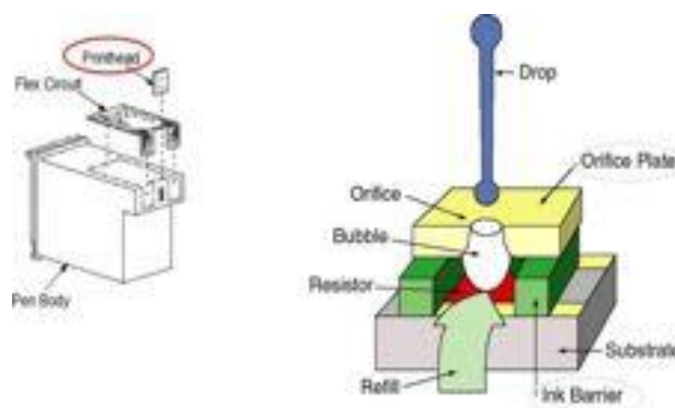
Print Head (Engine) for all HP Inkjet Printers.
